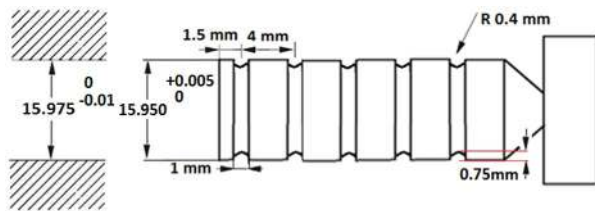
Dimensional schematic diagram of the position of the grooves along the piston surface.
